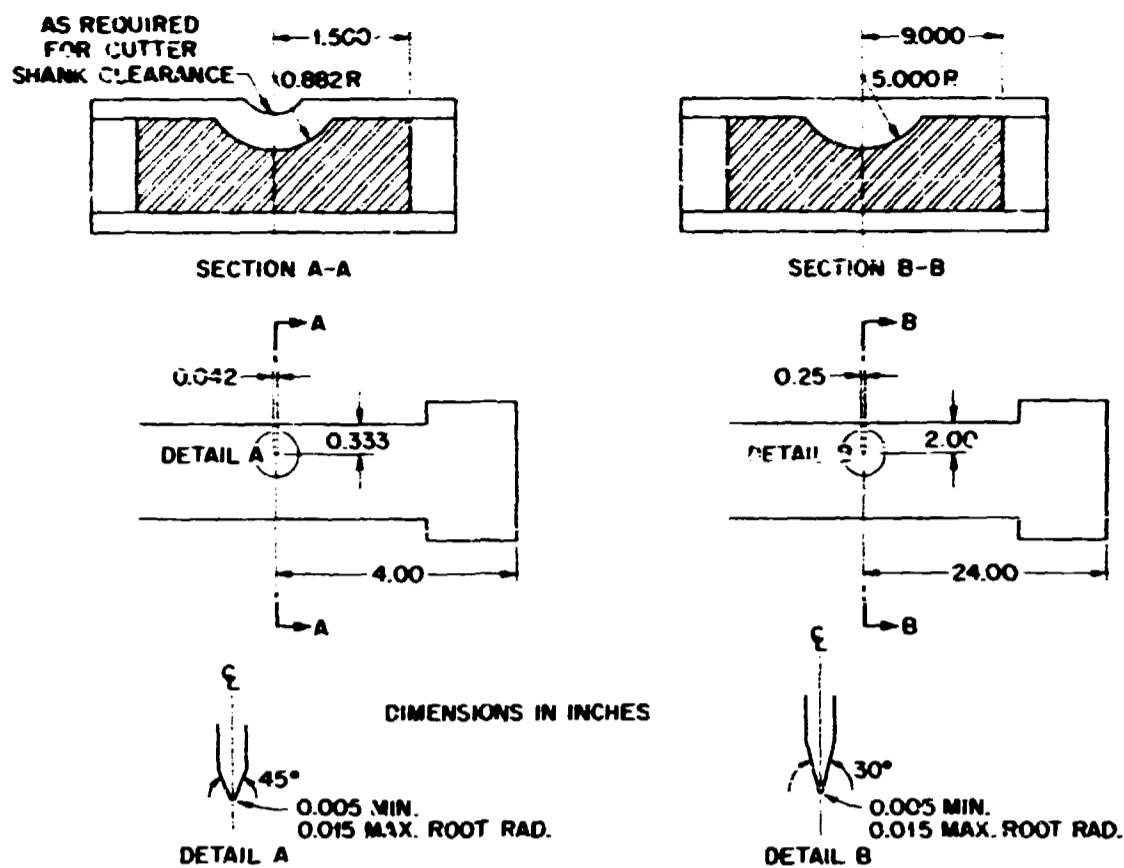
Notch details for one-sixth-scale and full-size test specimens.
